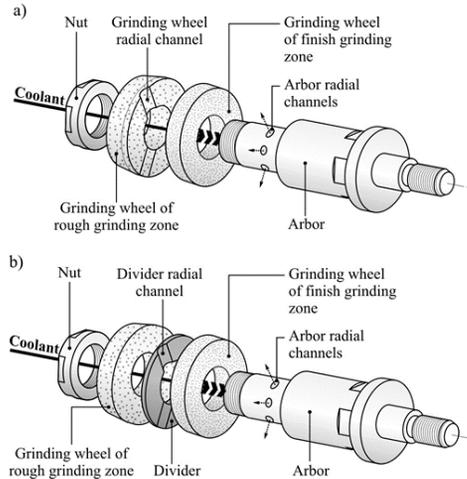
Schematic diagram of the sandwich grinding wheel with system of centrifugal supplying of the grinding fluid: a) through channels formed in the grinding; b) through channels formed in a divider between elementary grinding wheels [10]
